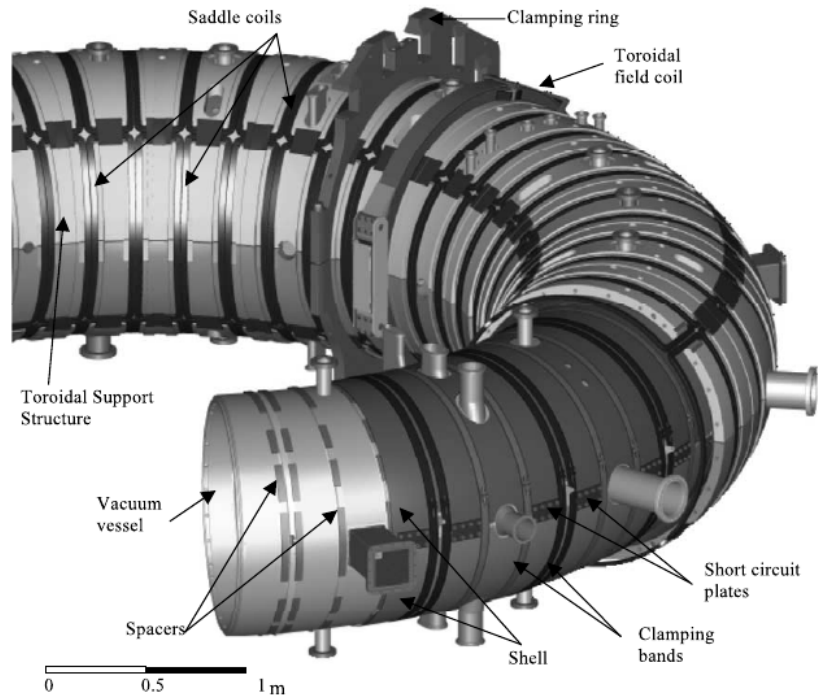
Sectional view of RFX-mod toroidal assembly
